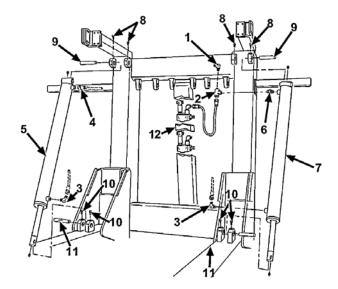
Hydraulic Cylinder (Main Frame to Mast)
